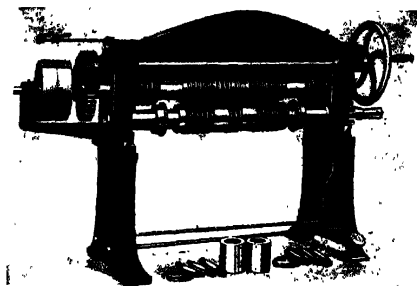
Corrugating rolls which have removable and adjustable sleeves. (Lee & Crabtree, Ltd.)
